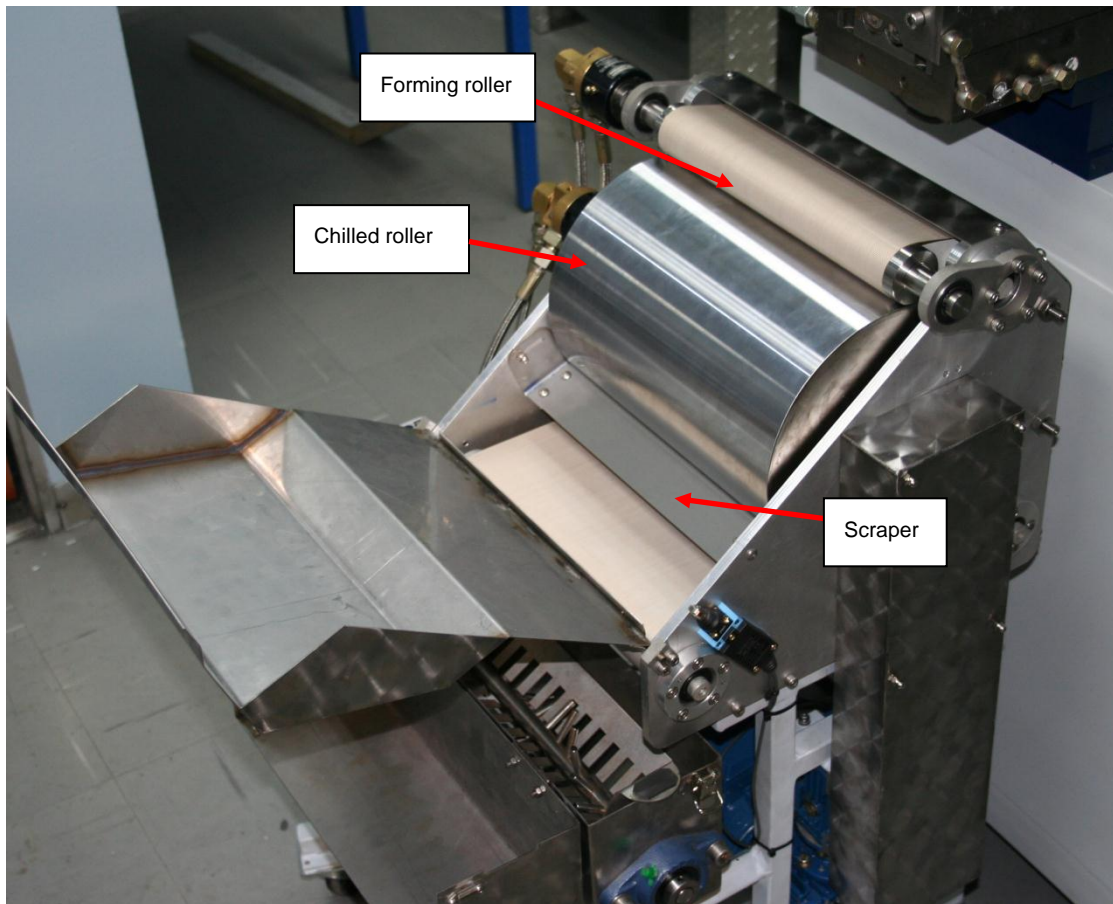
Chilled roller unit with installed conveyor belt (CFAM Technologies (Pty) Ltd, 2011).
